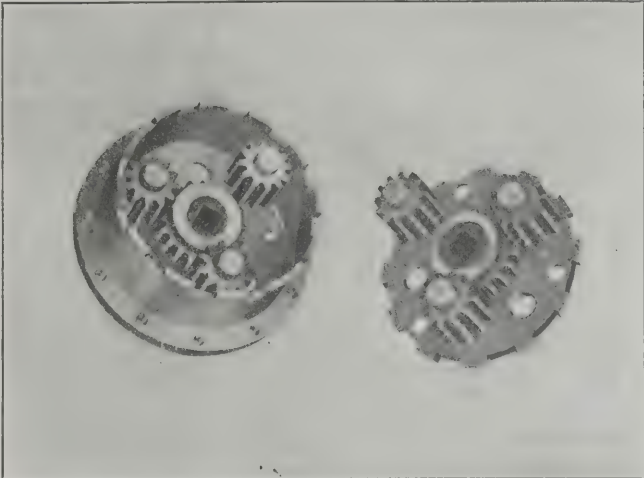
A Small Size of Equalizing Gear Dismantled to show Construction
